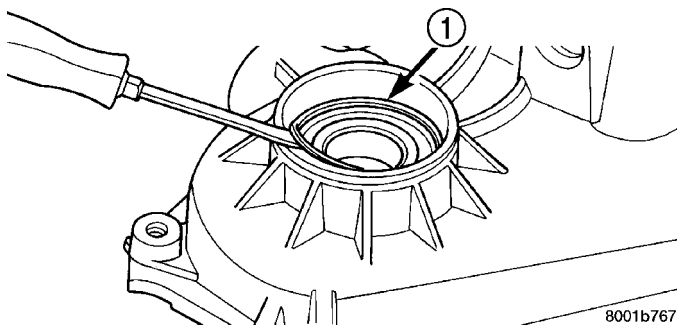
Installing Output Shaft Front Bearing Retaining Ring
